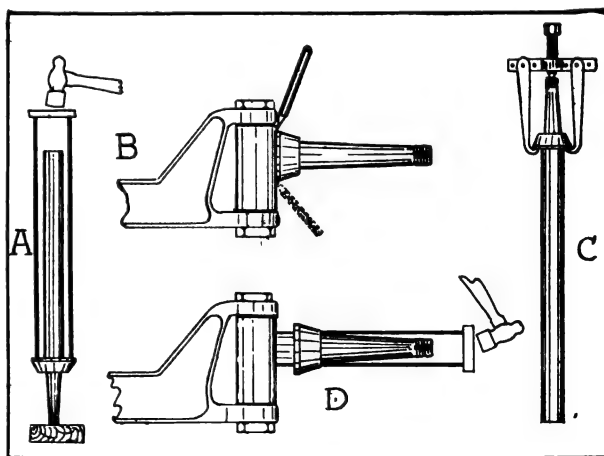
Removing Worn Bearing Cones: A, Starting a Bearing with a Section of Tube; B, Use of Thin Chisel; C, Wheel Puller Is Very Useful; D, Driving on Cone with Tube Section.
